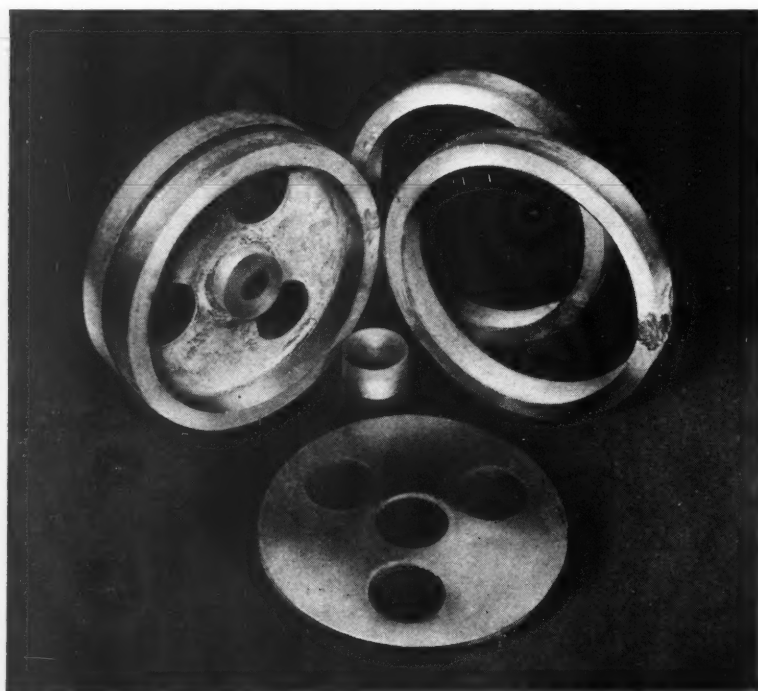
Component parts and assembly of a welded flywheel. The two rims are roll-formed, while the punched disc fits between the rims and over the hub
